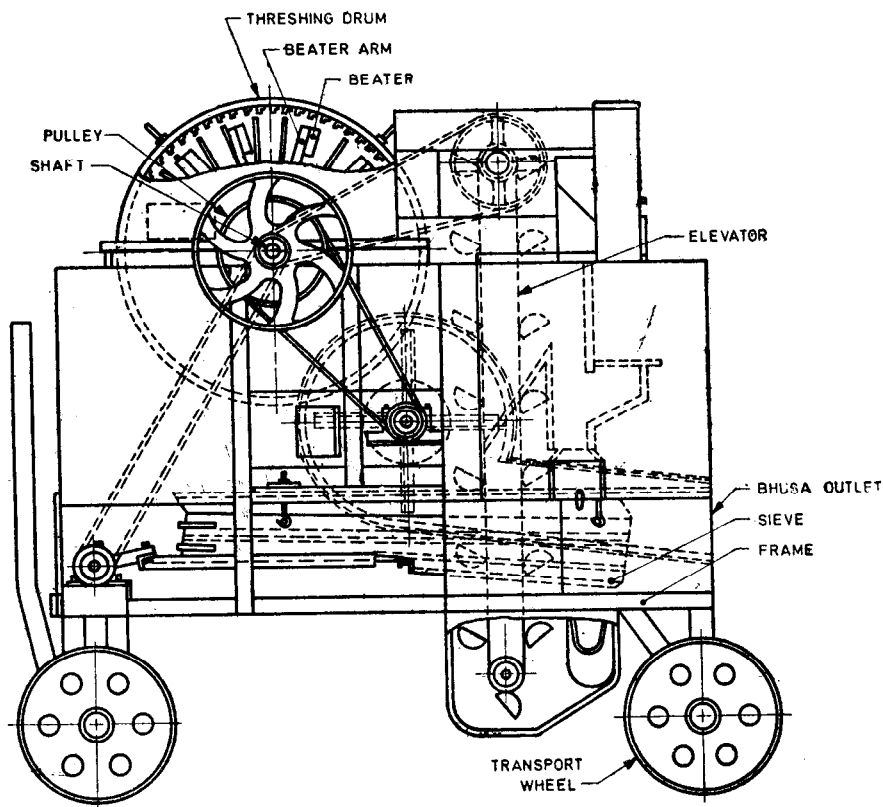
TYPICAL ASSEMBLY OF POWER THRESHER
